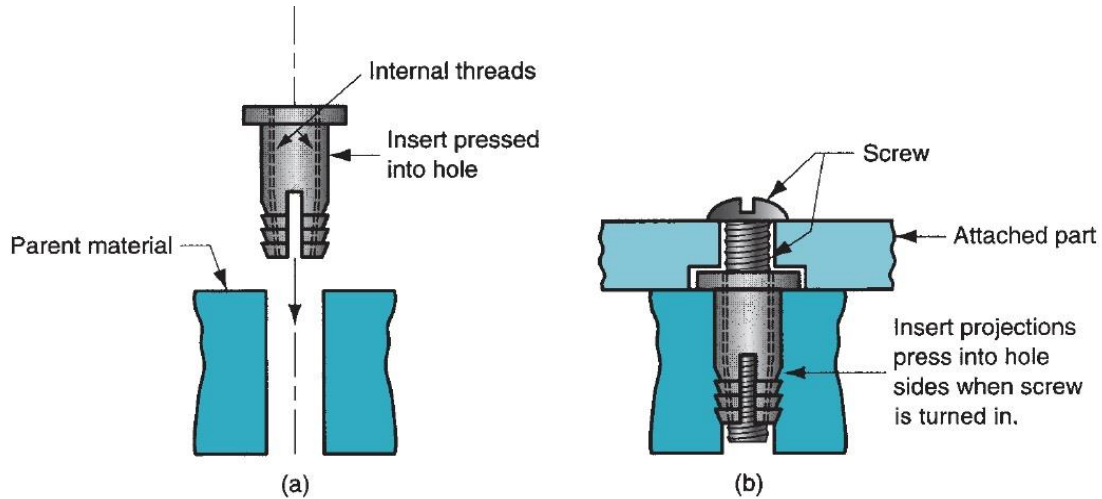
Screw thread inserts: (a) before insertion, and (b) after insertion into hole and screw is turned into the insert.
